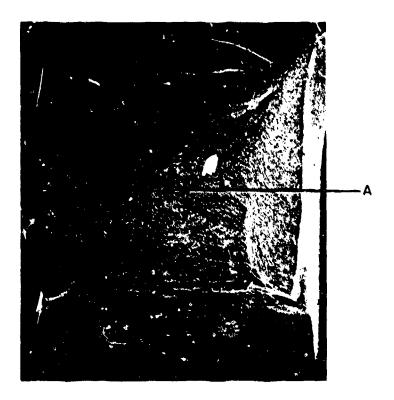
Fracture surface of an A-514 weld Charpy specimen tested at room temperature, 8x.
